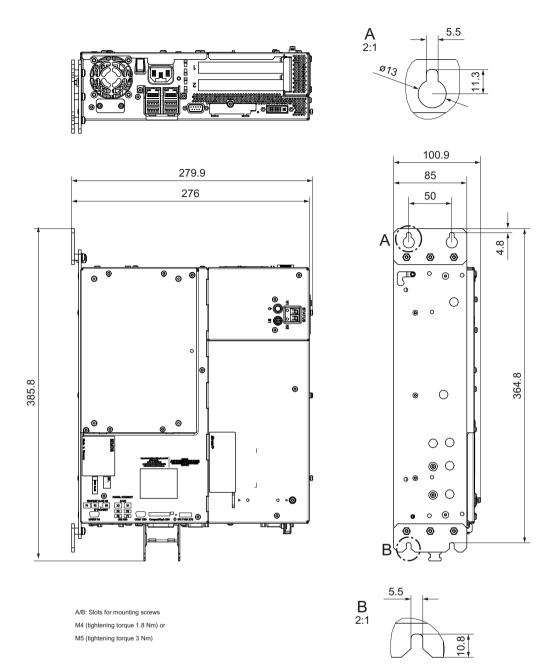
Dimension drawing for the upright mounting of the PCU 50.5 (power switch at the bottom)
